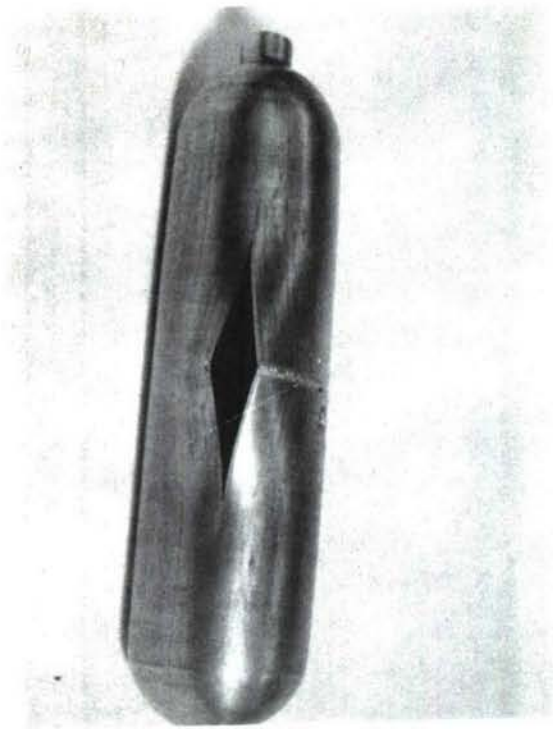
Cylinder No. 11 Showing Fracture at End of Circumferential Defect
